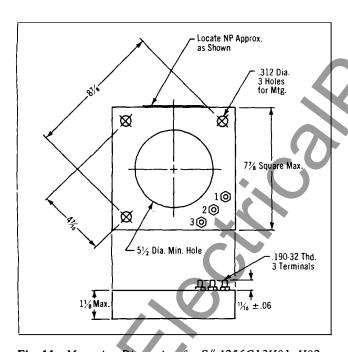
Mounting Dimension for S# 1256C13H01, H02
